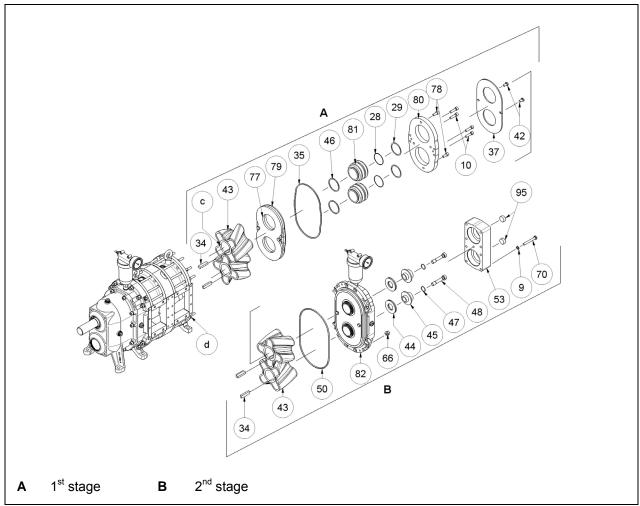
Disassembly of separation plates (for Marathon) and rotary lobe change
